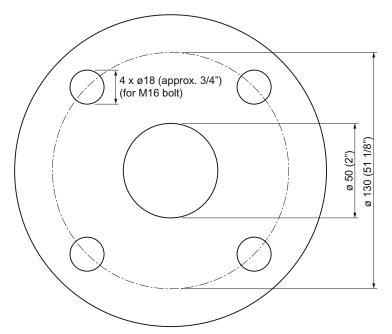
Dimensional drawing customer flange DN50/PN10-40, all measures in mm (inches)
